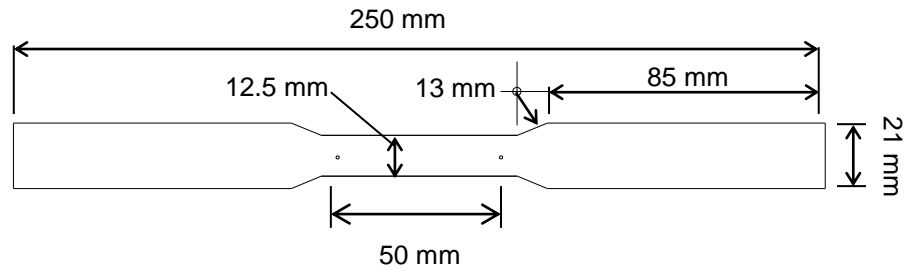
Standard nominal dimensions of coupon specimens according to ASTM [4.5]
